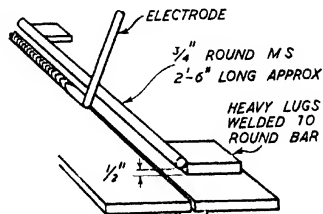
ELECTRODE GUIDE FOR DEEP PENETRATION WELDING
